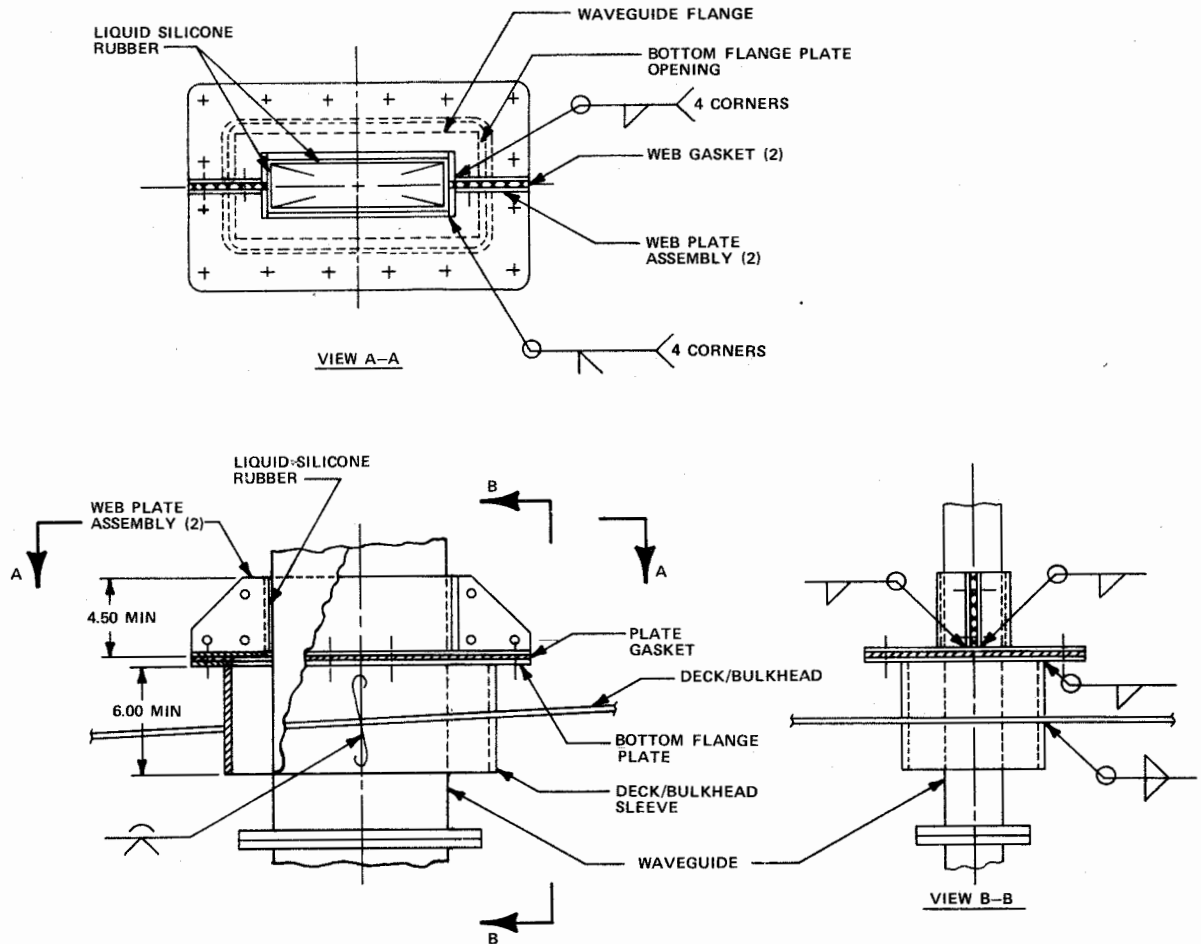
Typical Split Sleeve Assembly for Large Waveguide
